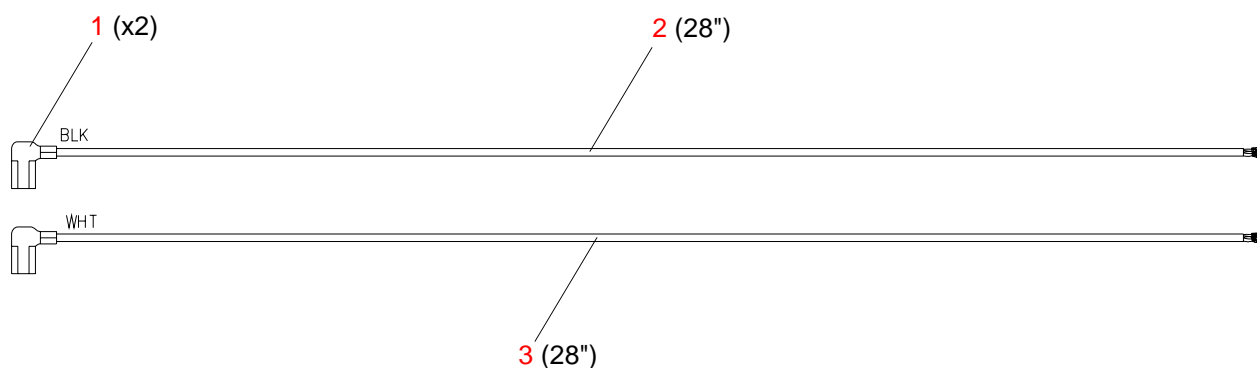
VL500 Display (Remote) Cable Assembly
